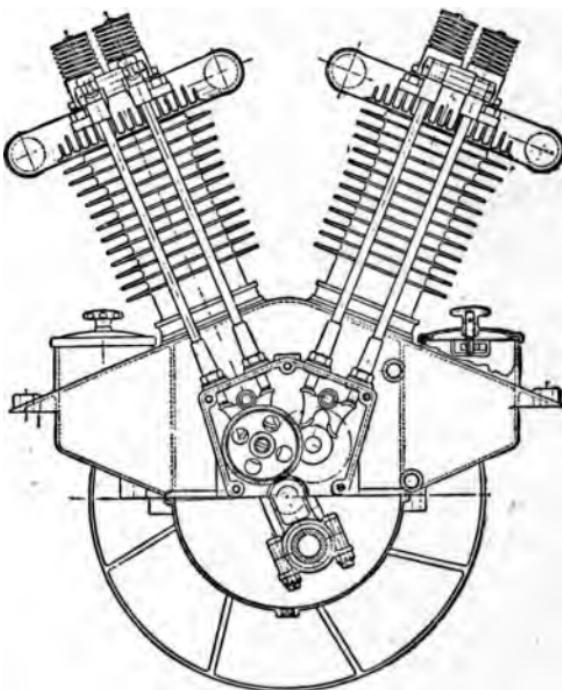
V-shaped two-cylinder engine, showing details of valve lifts, also position of crank at extreme outstroke.
